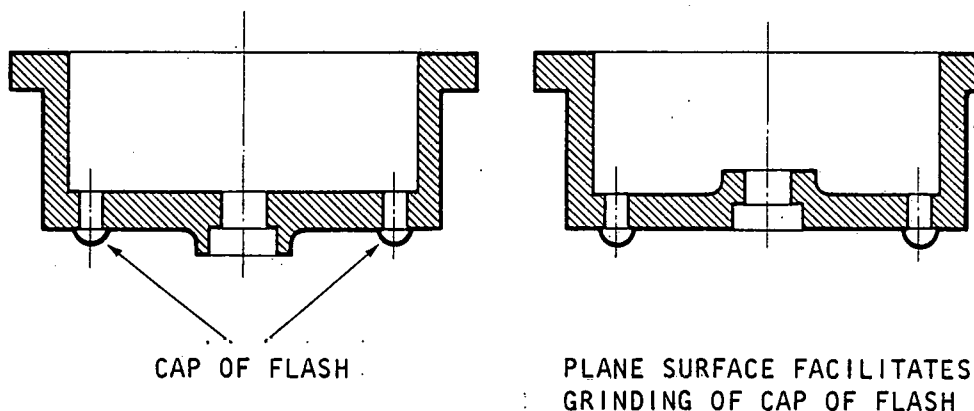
Plane Surface Facilitates Grinding of Burr Cap⁵⁷
